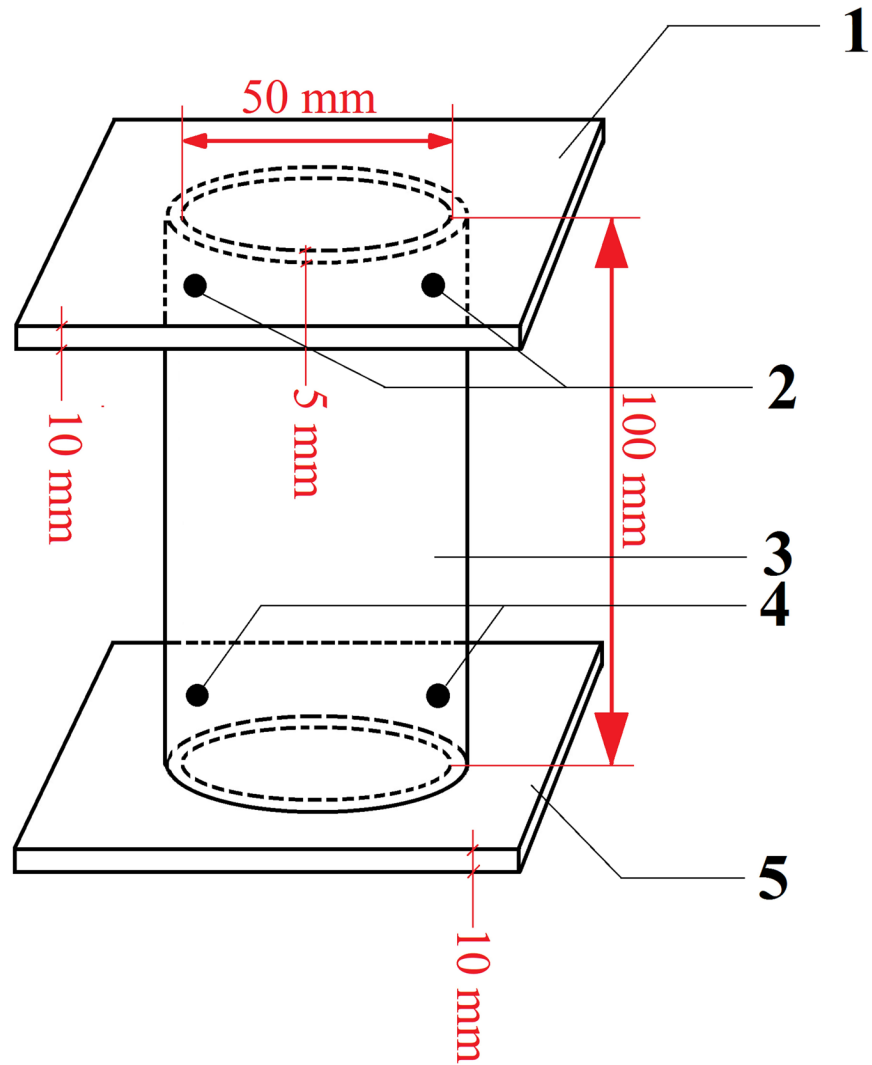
Schematic layout of the cylindrical sleeve mold: 1 = upper polyurethane plate; 2 = upper bolts; 3 = Aluminum sleeve mold; 4 = lower bolts; 5 = lower polyurethane plate.
